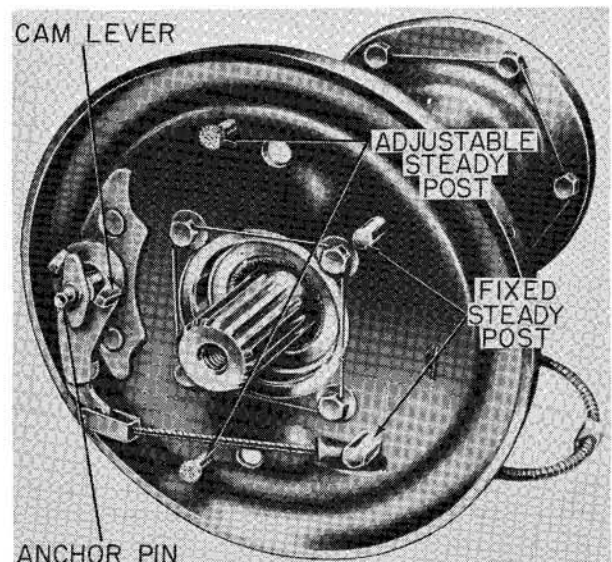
View of brake backing plate assembly with brake shoes removed. Refer also to Fig. 162.
